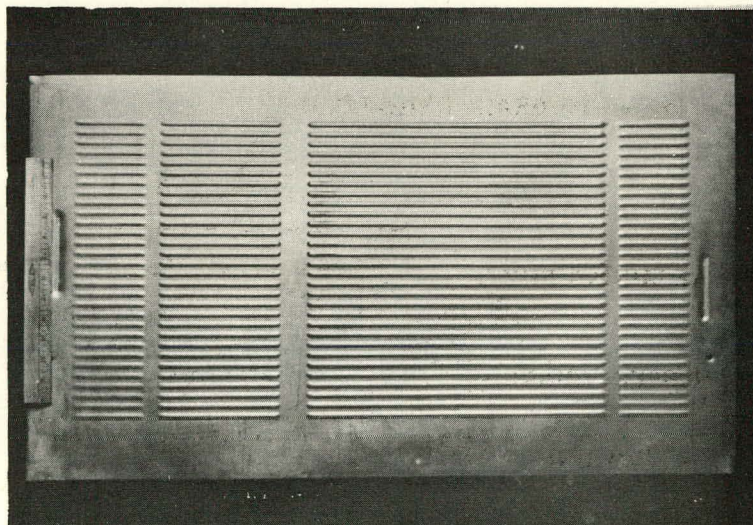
Explosively corrugated air duct panel (Courtesy Orenda Engines Ltd.)
